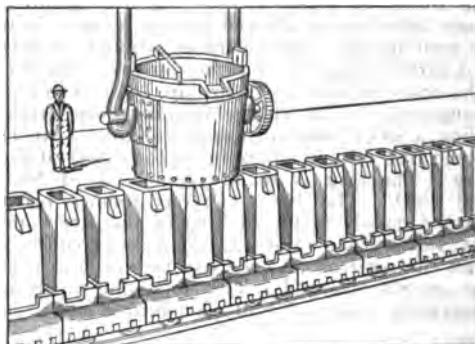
GENERAL ARRANGEMENT OF CASTING INGOTS WITH BOTTOM POURING LADLE.
